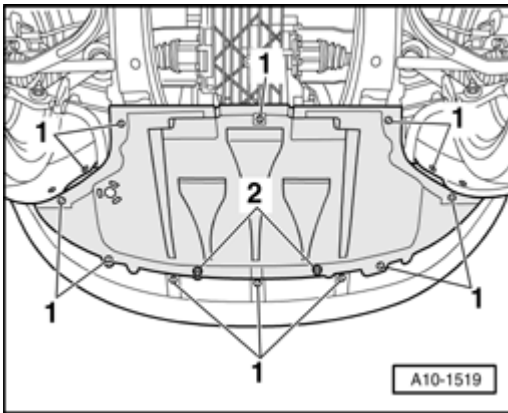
Removing Quick-Release Fasteners, Screws And Noise Insulation
